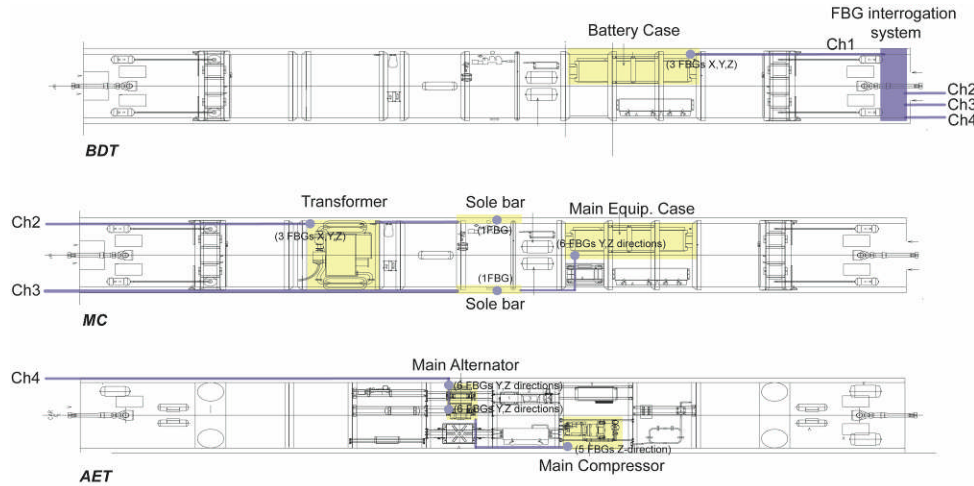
Locations of weld joints where FBG sensors are installed for monitoring dynamic strains of critical parts: BDT = Battery Trailer, MC = Motor Car, AET = Auxiliary Equipment Trailer.
